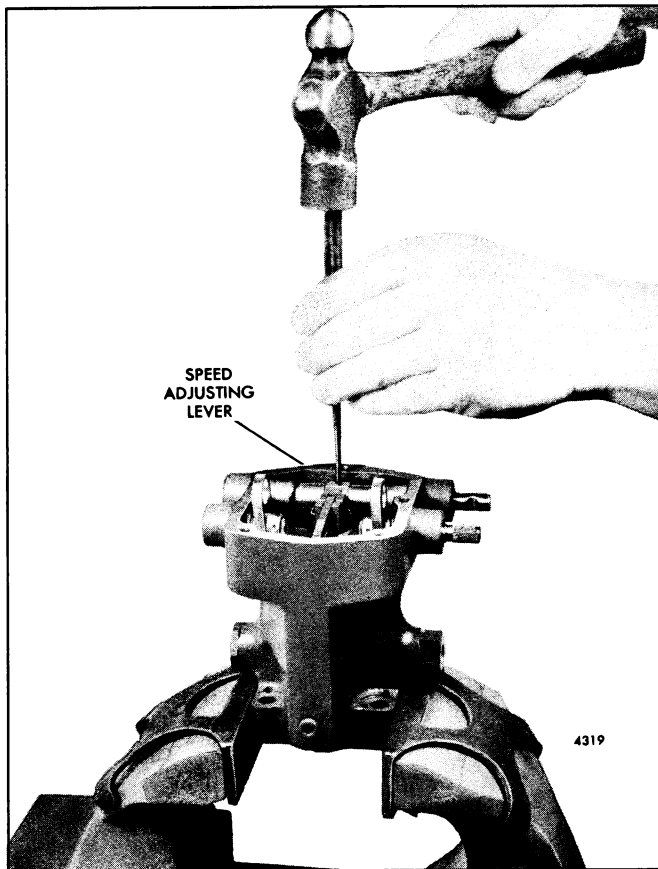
Removing Speed Adjusting Lever Roll Pin
